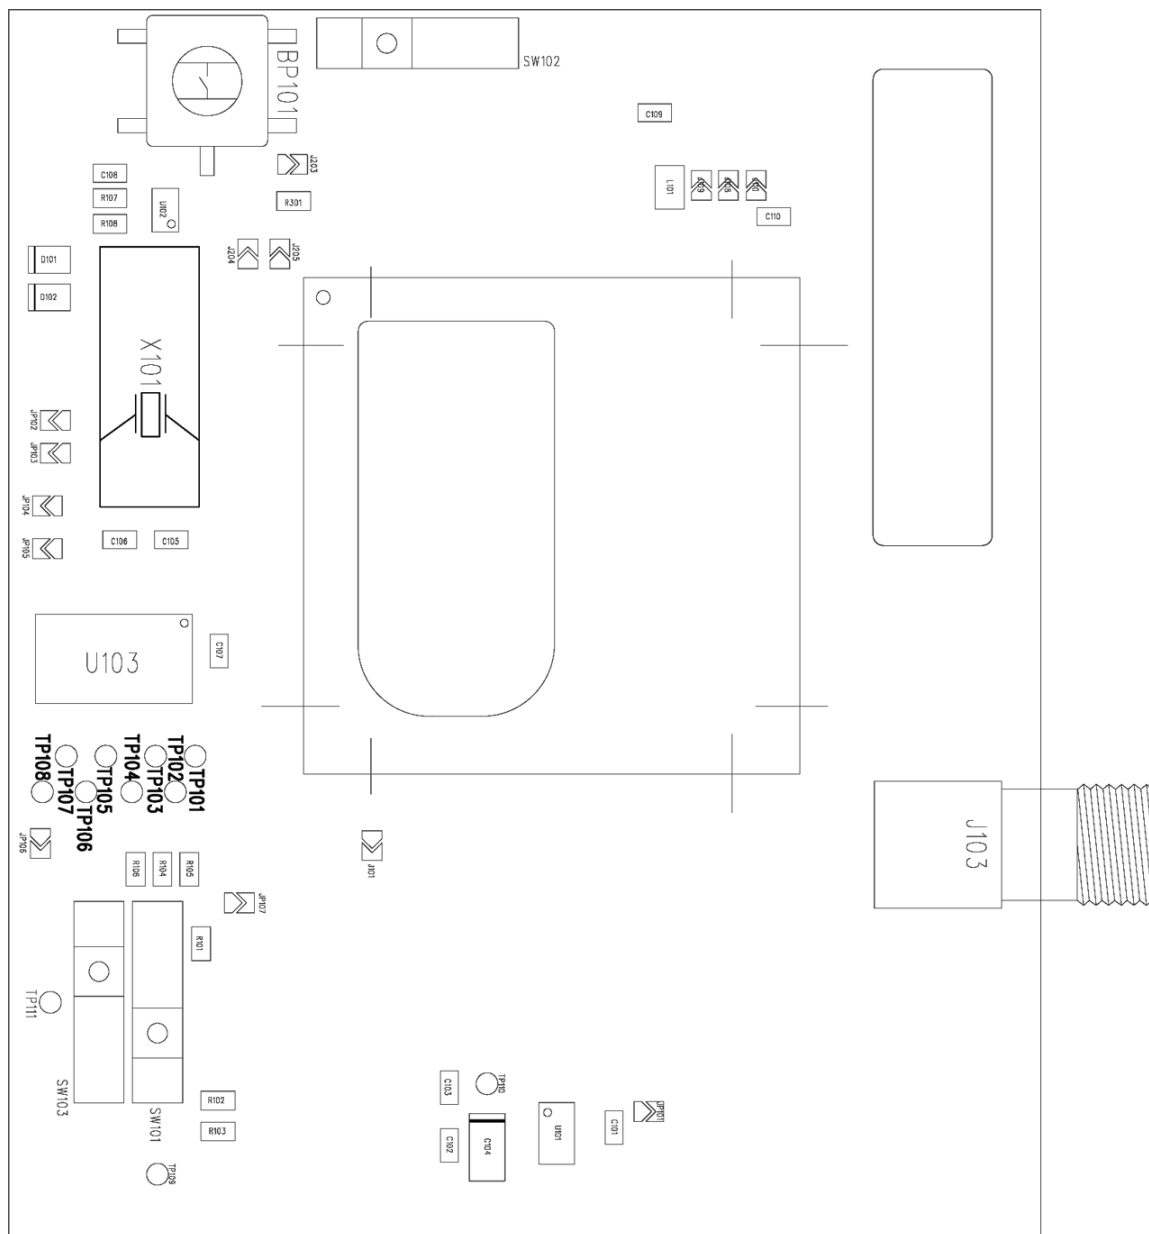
AirPrime WISMO2x8 Socket Board (Top View)
